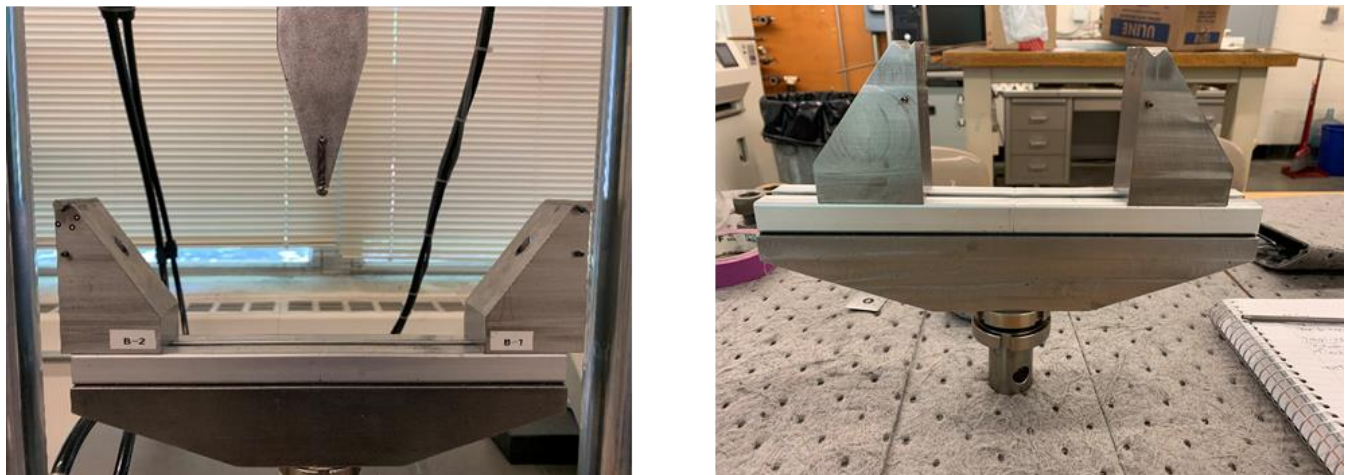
Existing 3PB test fixture in the UW Mechanical Test Laboratory that is to be modified for Gap Test use.
